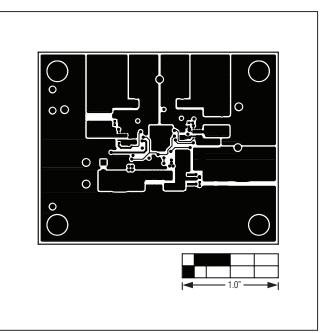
MAX15049 EV Kit PCB Layout—Component Side
